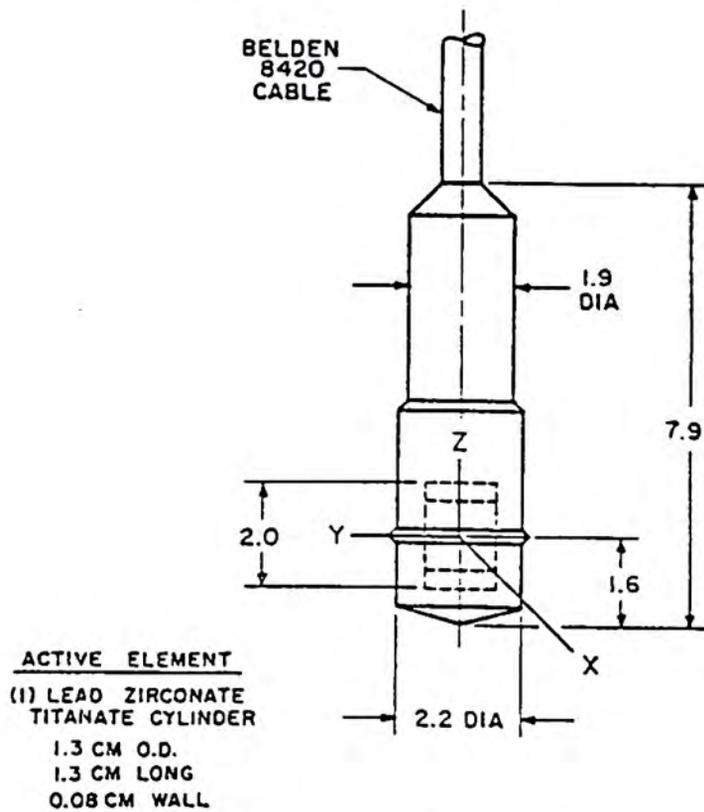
Dimensions (in cm) and orientation of Type F61 transducer.
